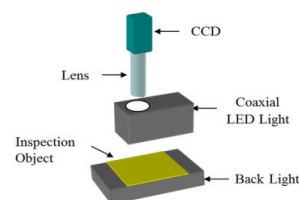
Automatic optical inspection system for IC molding surface
